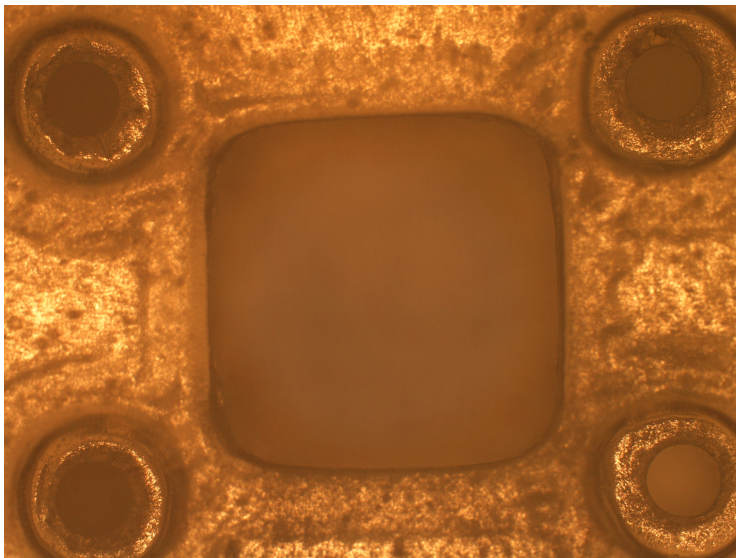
Back surface of the 3D-printed interface used for our experiments. The holes located in the center of the grooves were manually drilled.
